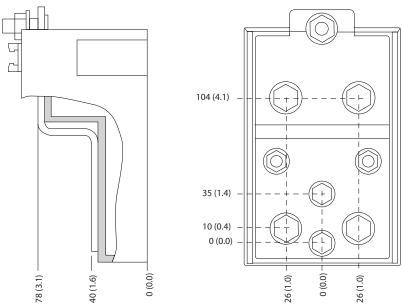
Detailed Terminal Dimensions for E1/E2
